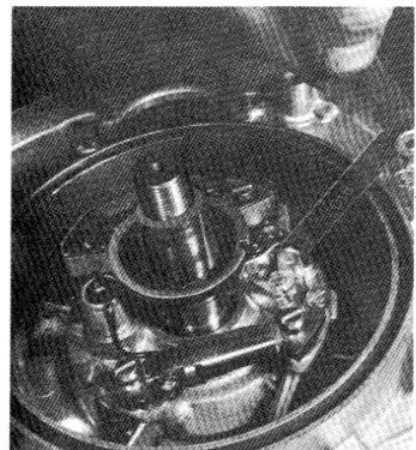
On some engines, breaker cam can be removed from flywheel and positioned over crankshaft for point adjustment.
